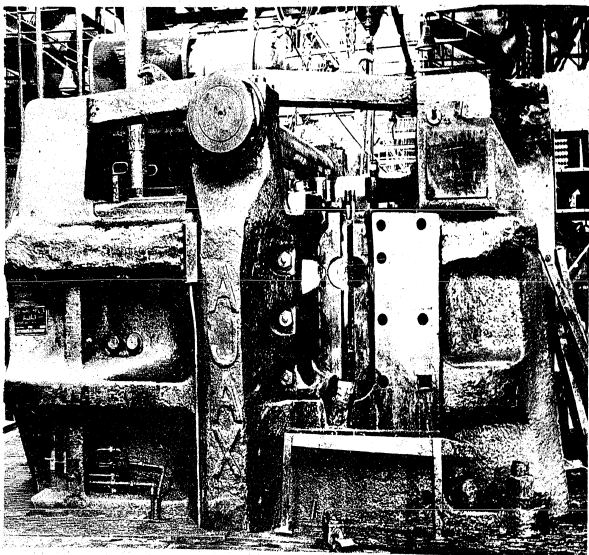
PHOTOGRAPH OF THE SIX-INCH UPSETTING MACHINE.
